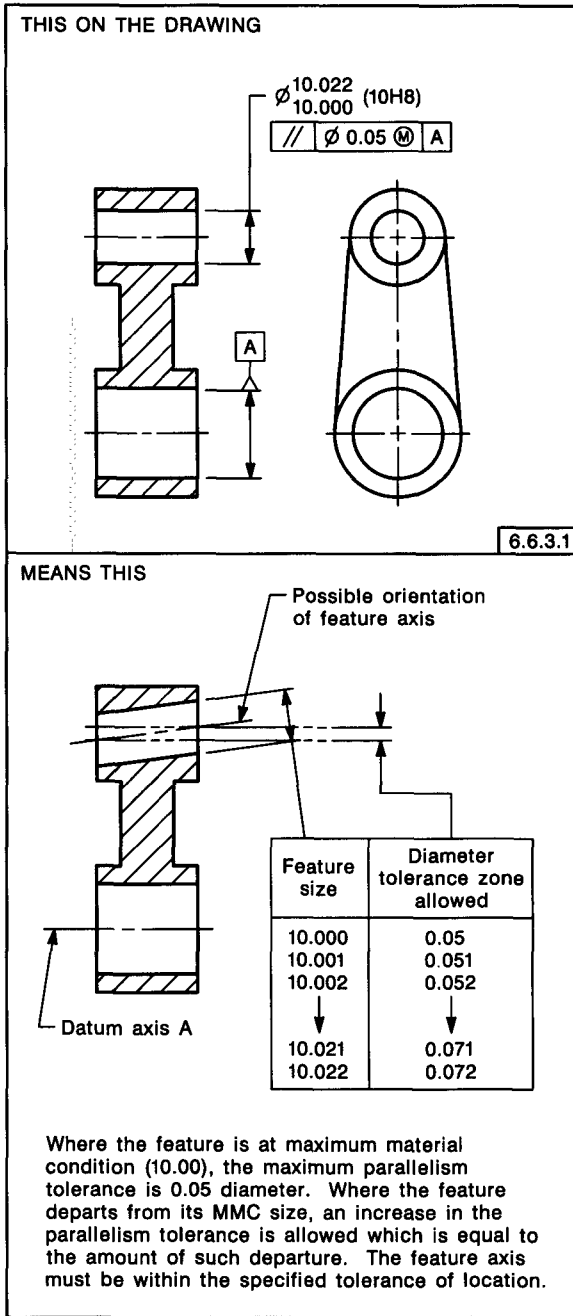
SPECIFYING PARALLELISM FOR AN AXIS (FEATURE AT MMC AND DATUM FEATURE RFS)
